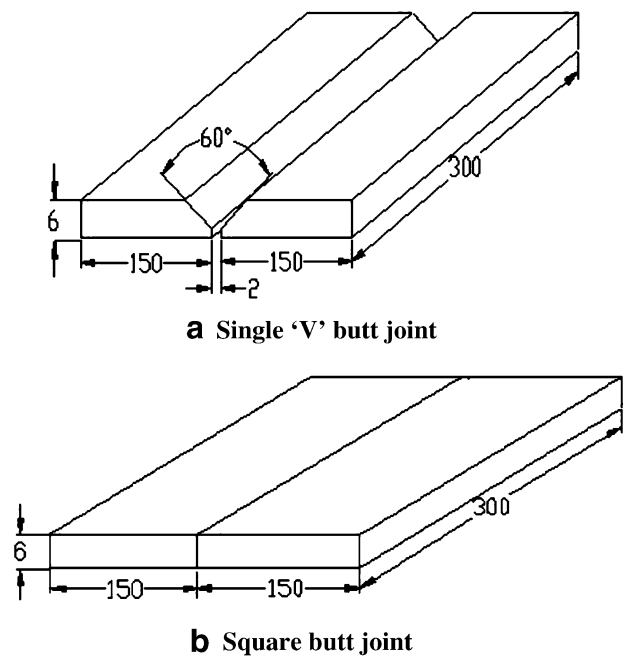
Dimensions of joint configuration All dimensions are in ‘mm’
